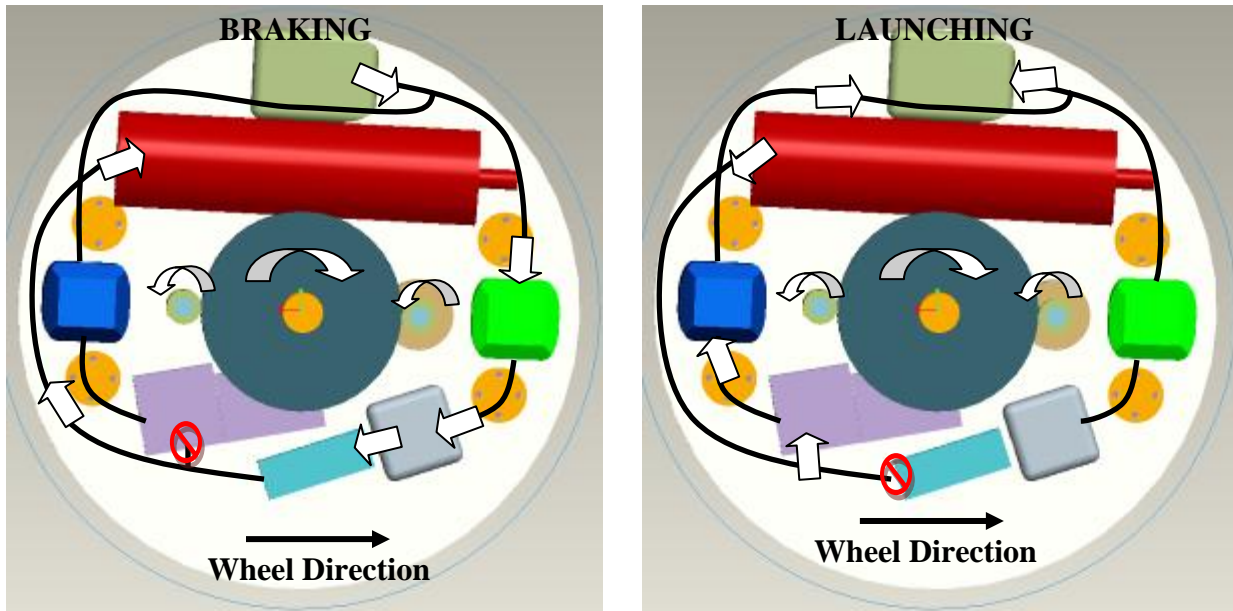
Direction of gears and plumbing while braking (left) and launching (right)
